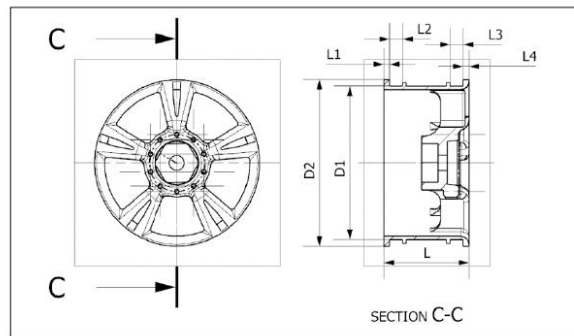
2D drawings of the wheel part with dimensional descriptions
